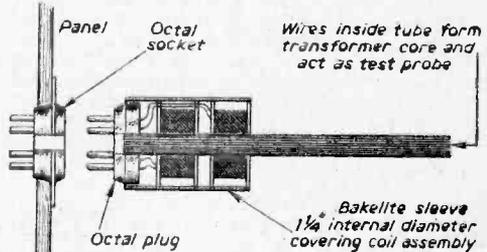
The completed probe, with the octal plug attached (the core is formed from iron wires).
